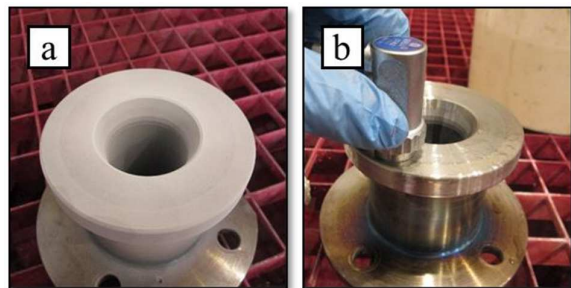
Ball valve flange quality assessment via dye penetrant (a) and ultrasonic inspections (b).
